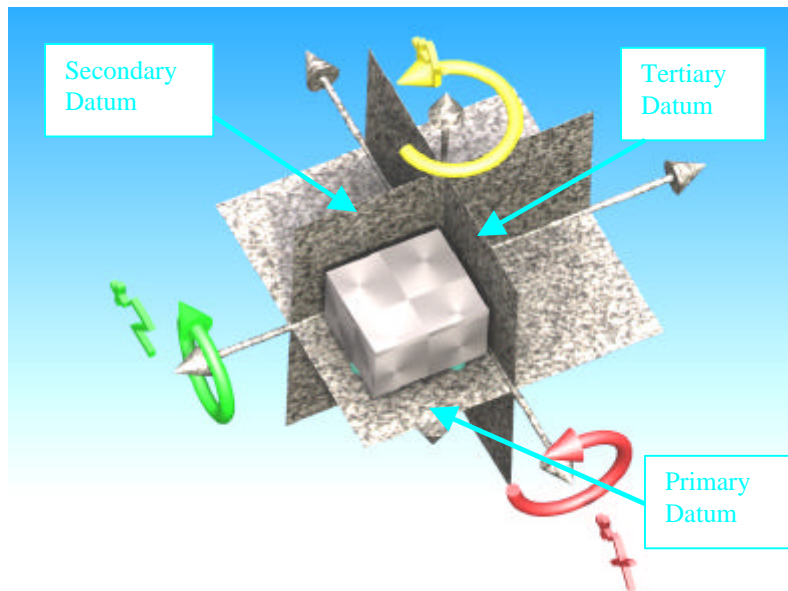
Illustration of coordinate system showing part with contact on primary datum.
